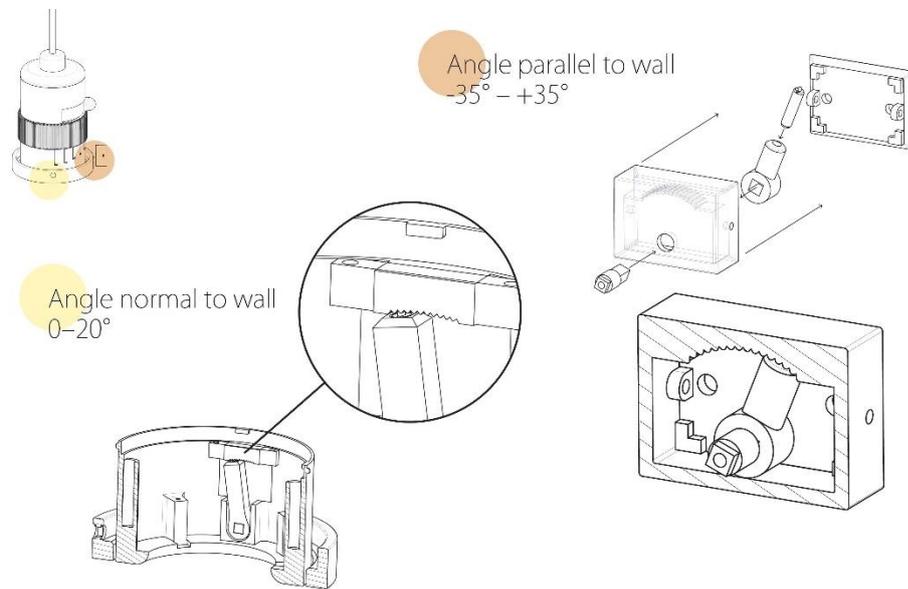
Angle adjustment with tactile feedback for the first prototype.
